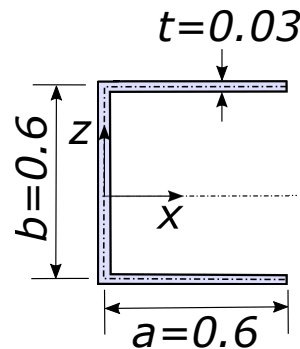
Geometry of thin-walled channel-shaped composite beam (dimensions in mm)
